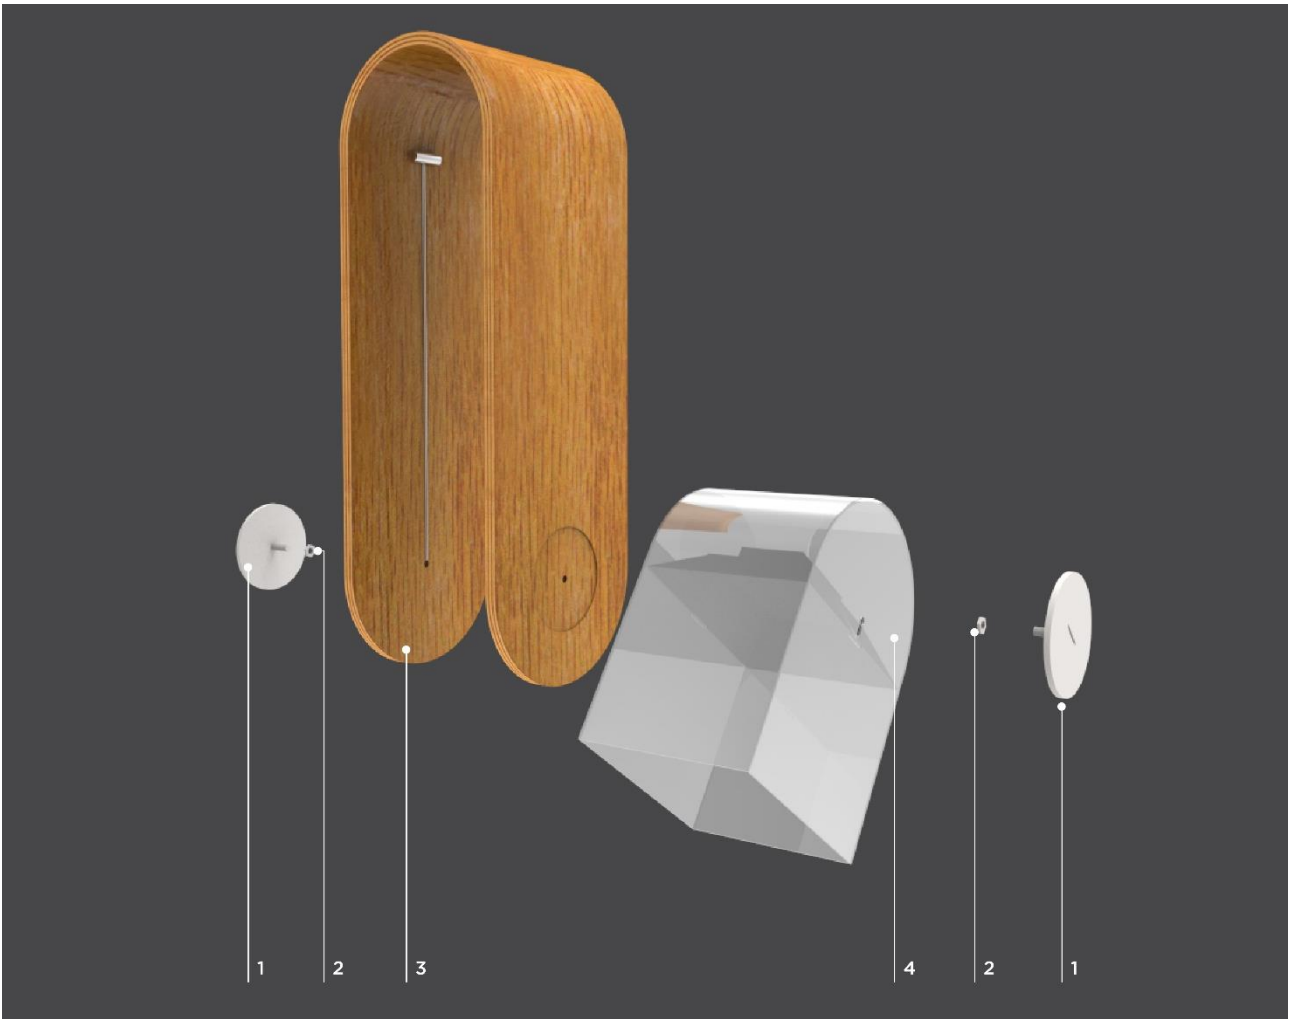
Workspace luminance regulation: lighting fixture exploded view: (1) screw; (2) nut; (3) polycarbonate box; (4) "U" in plywood.
